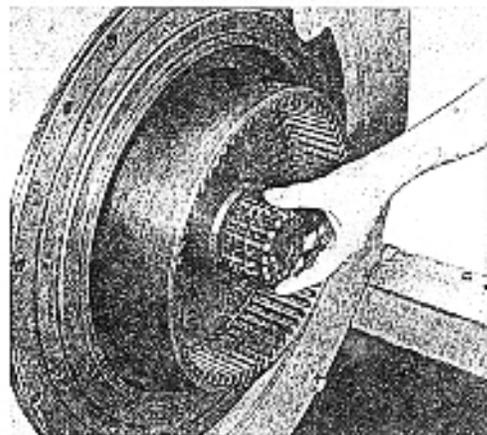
Installing Snap Ring in Groove on Drive Flange Shaft.
